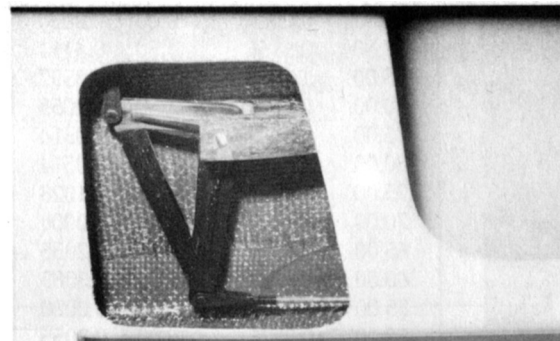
Finished assembly is mounted inside the fin of the fuselage
